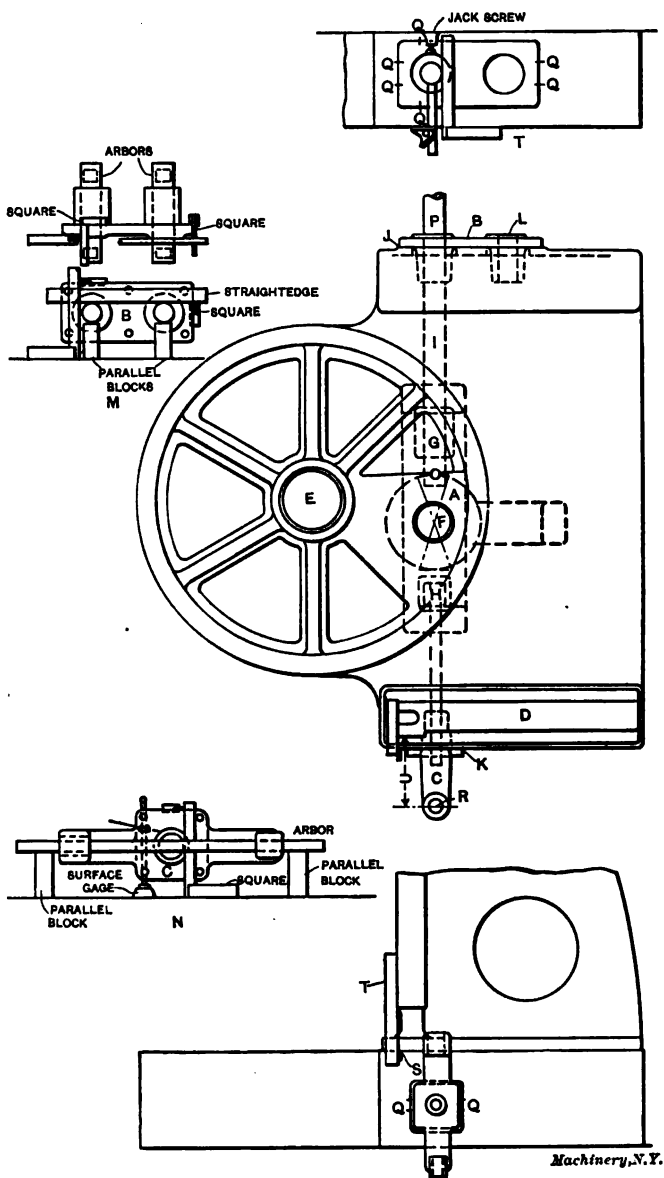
Laying-out and Aligning Operations on a Vertical Boring Mill of the Spur Gear Driven Type. By the Method shown, no Special Gages or Tools are required
